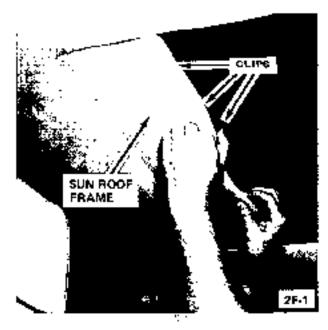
F-1 Separating Sun Roof Frame From Sun Roof Panel
